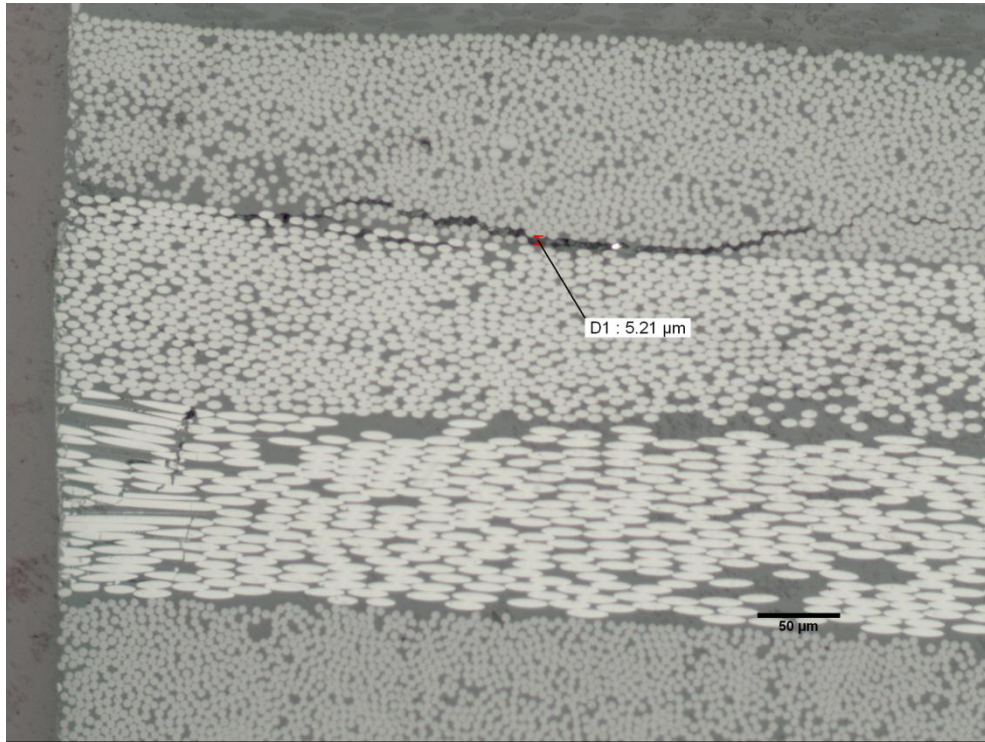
Optical microscope image of a cross-section CFRP sample showing cracks into the workpiece material with the scale less than 15 μm when drilling with 120 s LN_2 pre-cooling cooling at a cutting speed and feed rate of 100 m/min and 0.12 mm/rev respectively
